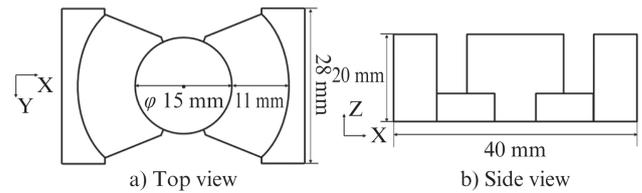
Top view and side view of ERX40 shape of ferrite core
